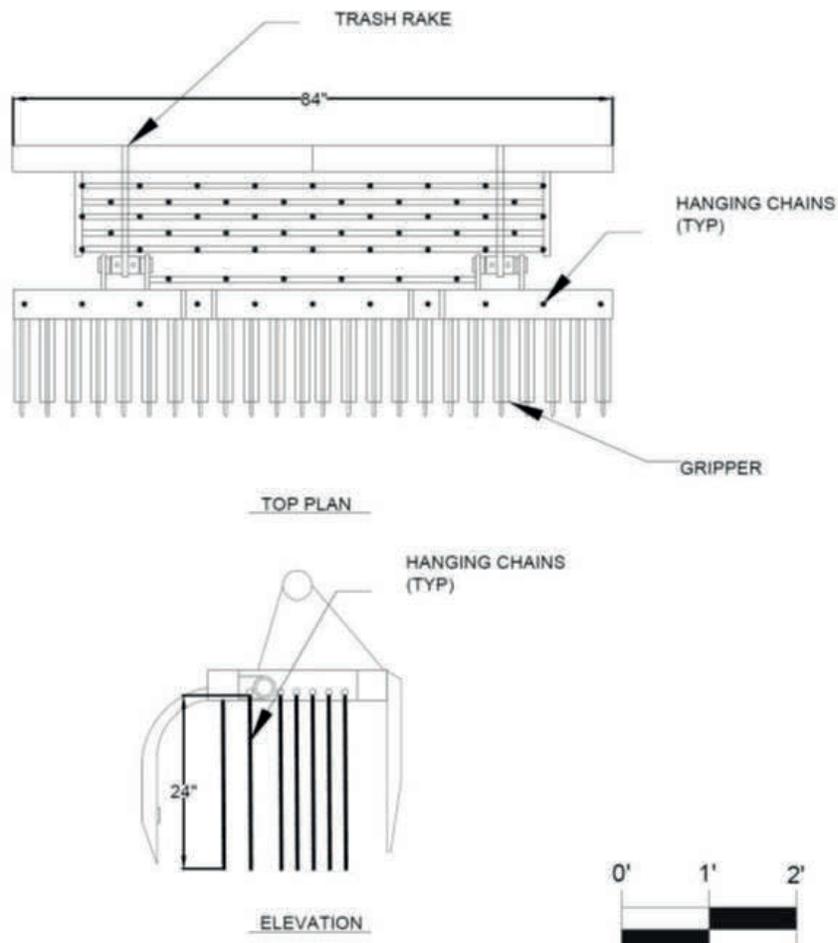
Conceptual layout of a trash rake mounted hanging chains – plan and elevation views.
